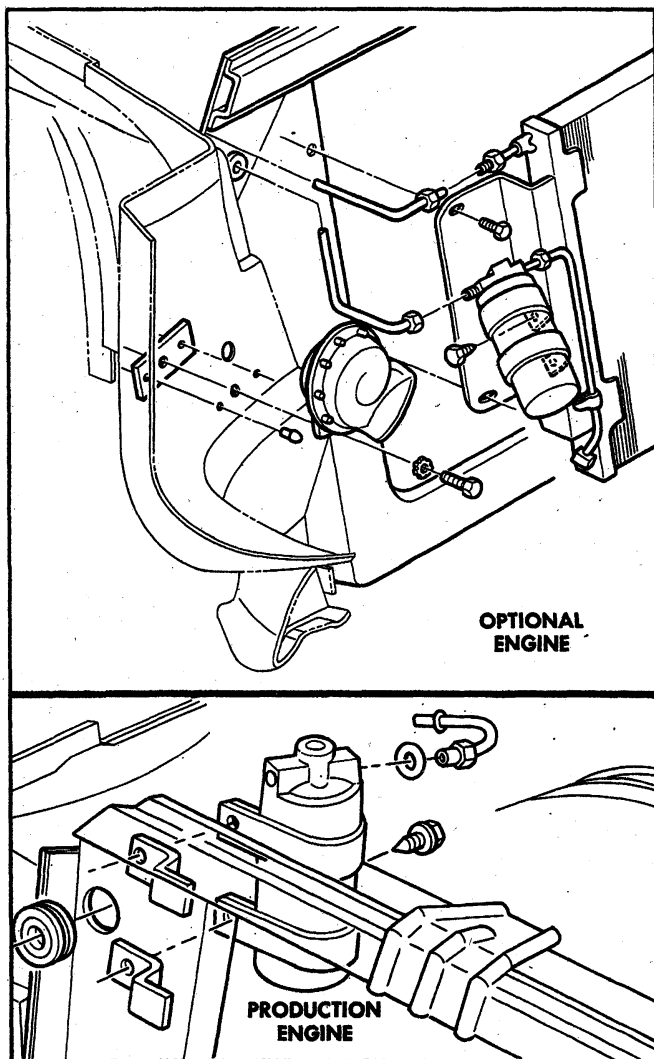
Receiver-Dehydrator Mounting (Corvette)
